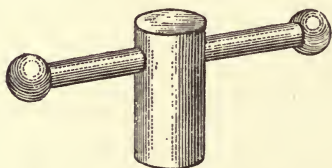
Perspective of Tailstock Spindle Clamp.
